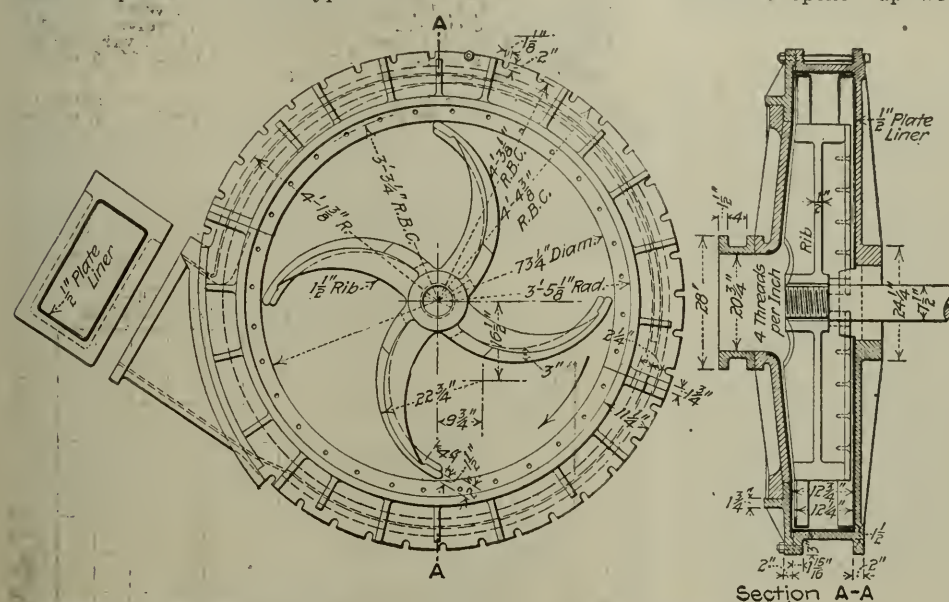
DETAILS OF PUMP ON DREDGE "PELICAN" WITH IMPELLER IN PROPER POSITION
